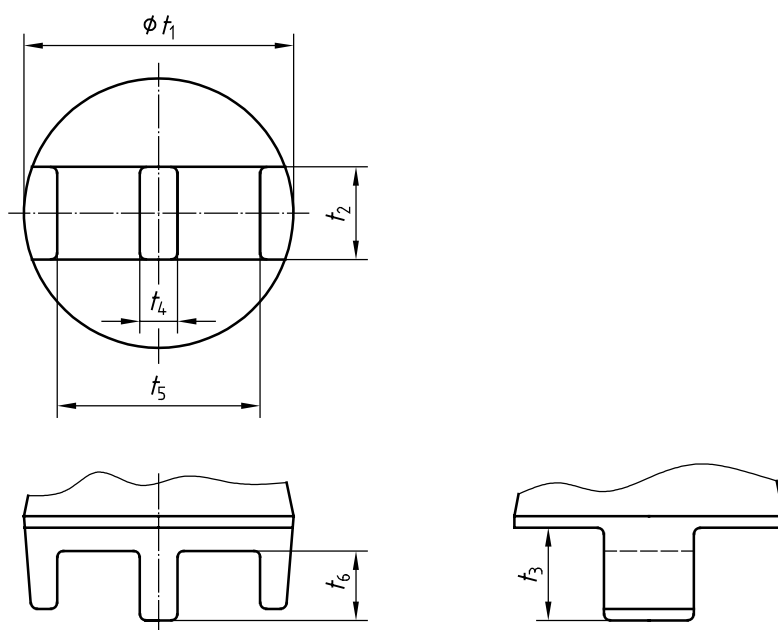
Plug wrench adaptor for G 2 and G 3/4
